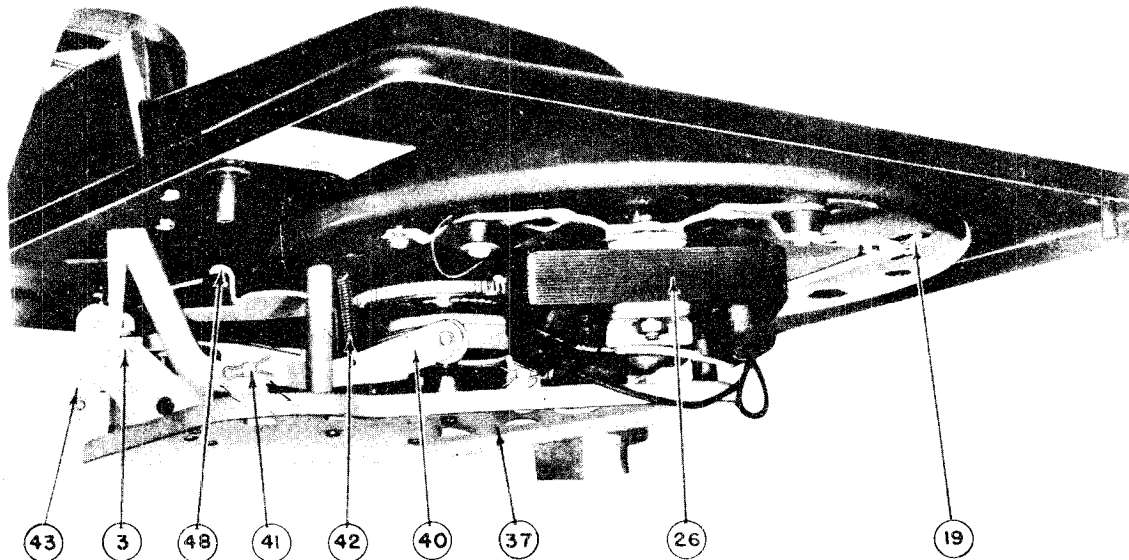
PARTS LOCATION -- LEFT SIDE VIEW
